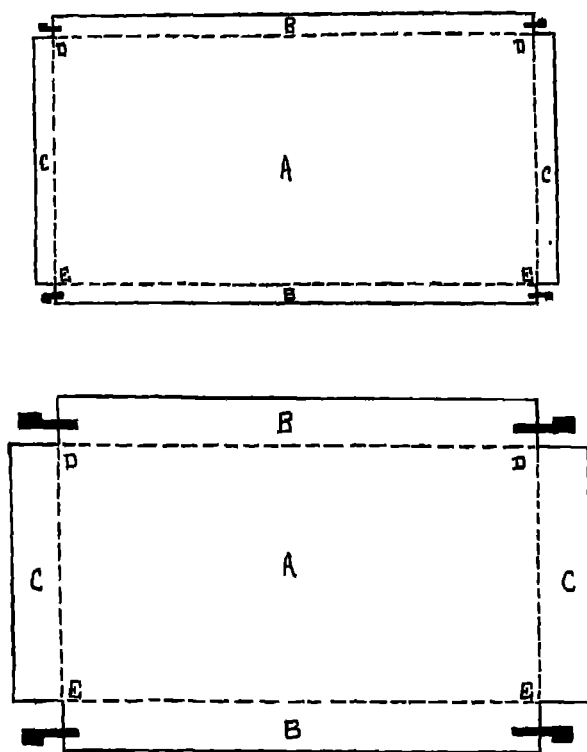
TWO-PIECE BOX TO HOLD HALF-DOZEN LADIES' HOSE.
